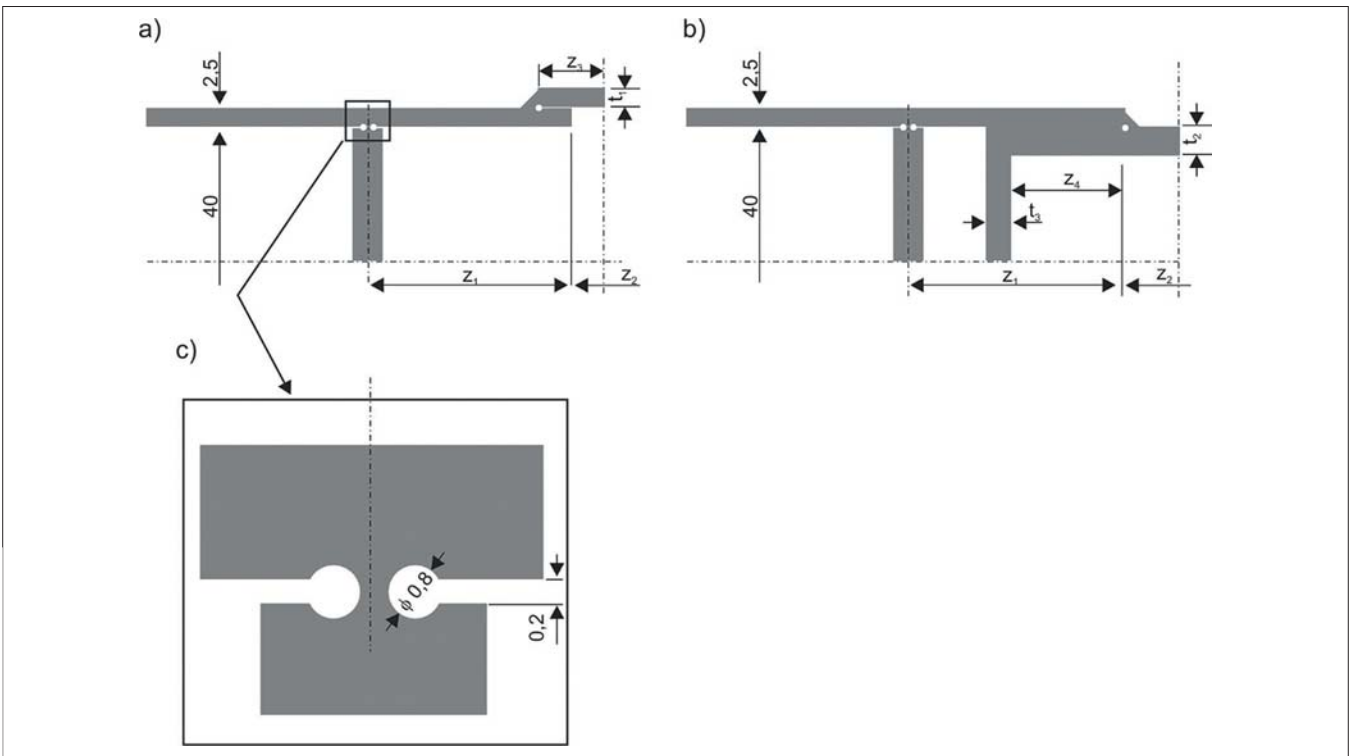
Geometry and variables assumed for calculation of joints: a) by cover plate; b) by quadratic tube; c) model of connection between shell and stiffener
